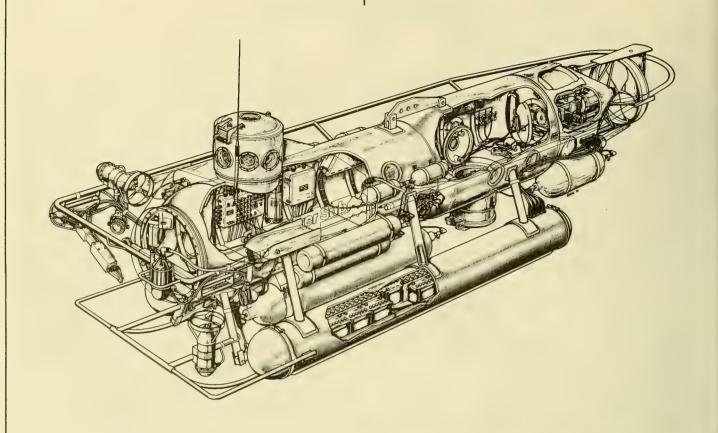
Cut-away Drawing of InterSub's PC-1202, Built by Perry
